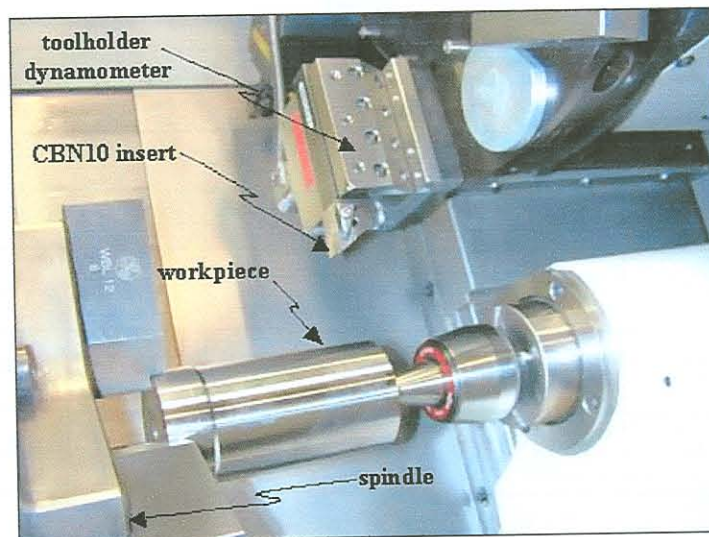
Layout of workpiece and dynamometer experiments 4-8
